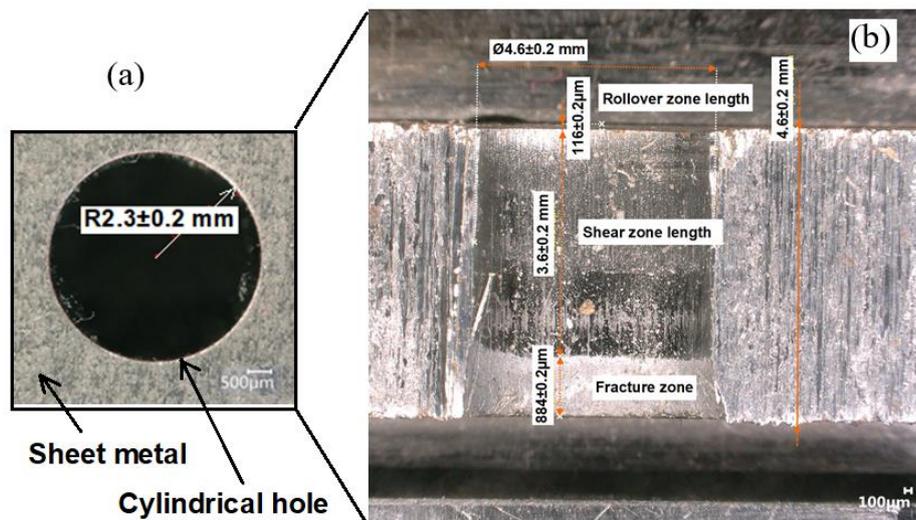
(a) Blanking process of sheet metal: (a) sheet metal with cylindrical hole, and (b) cross-sections of sample.
